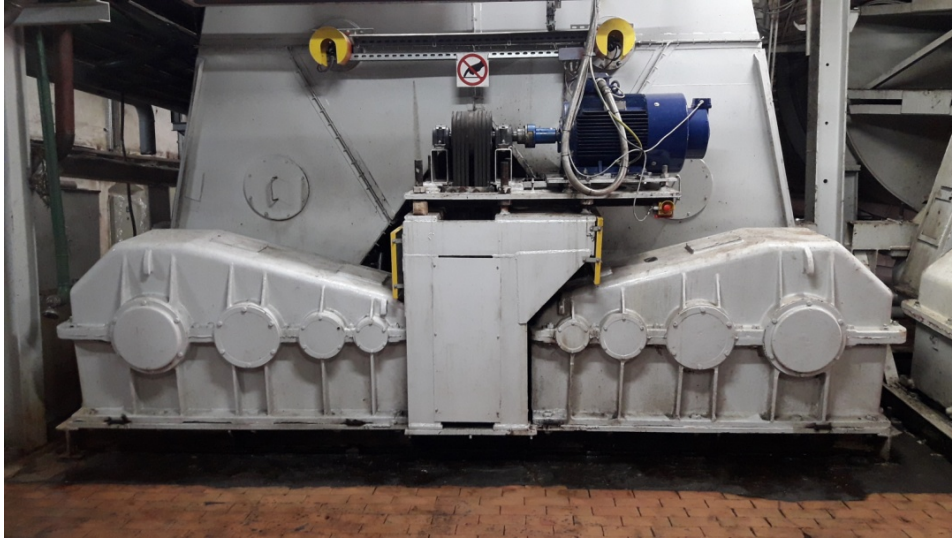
Multi-phase, angle-roller gear of the type Zamech BWR304 no. 1 and 2
